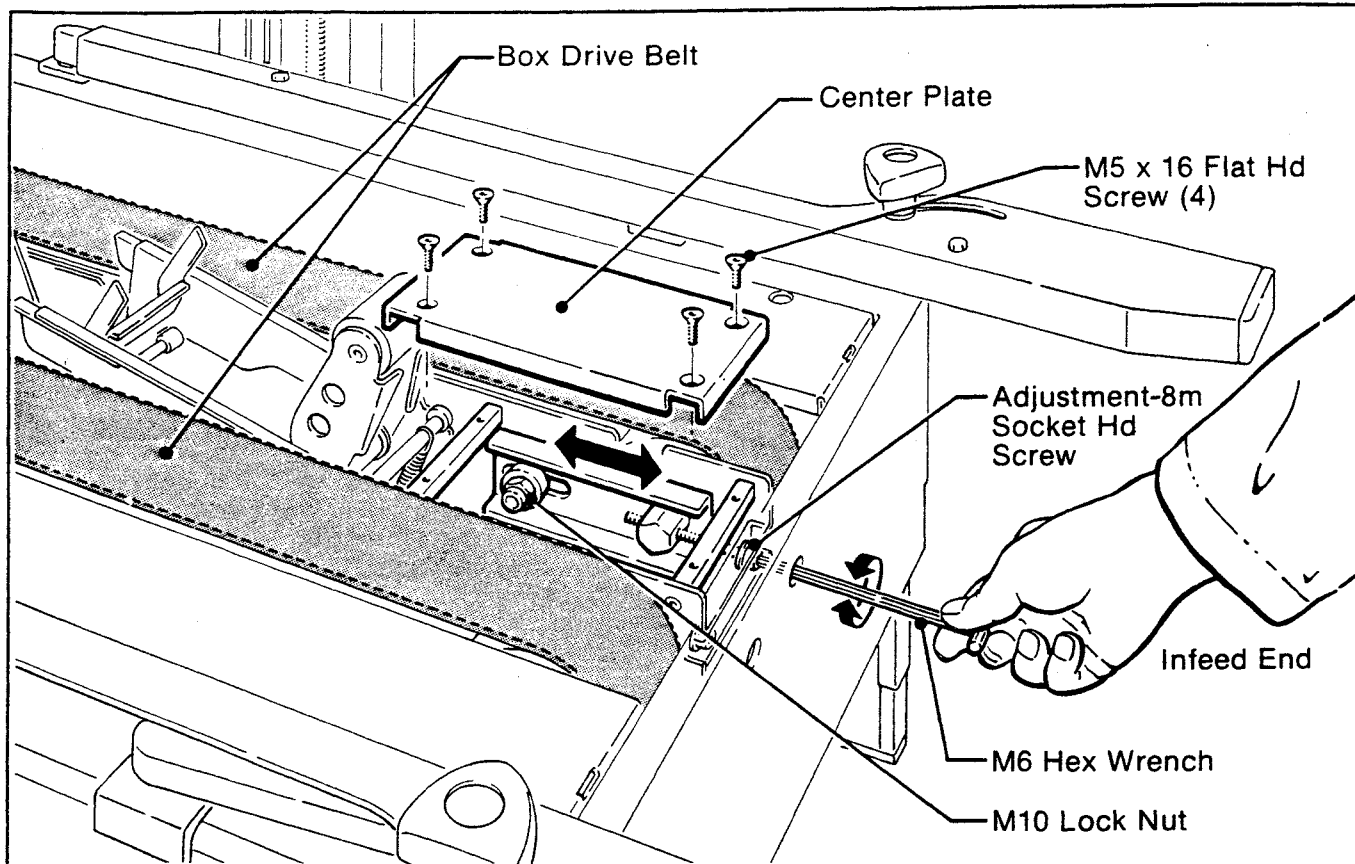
Box Drive Belt Tension Adjustment - Frame Bed Infeed End
